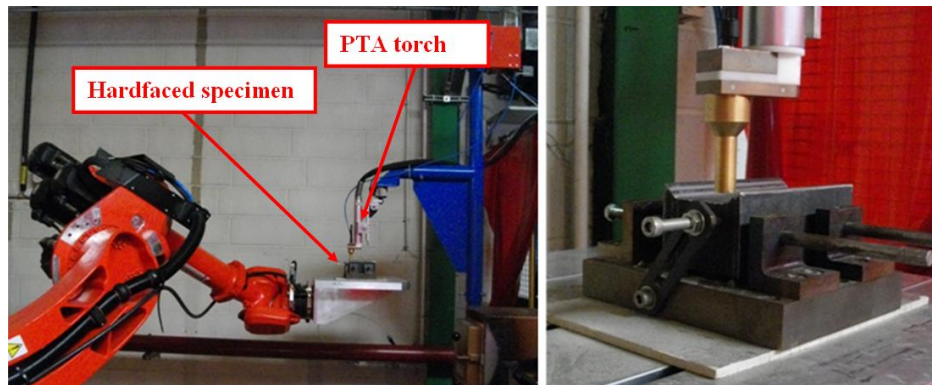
Hardfacing equipment: robot controller and PTA torch.
